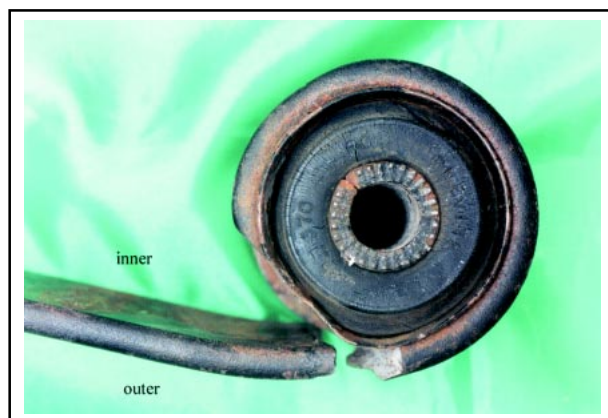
The broken halves of the spring have been placed together in a manner exaggerating the opening of the eye before rupture.
